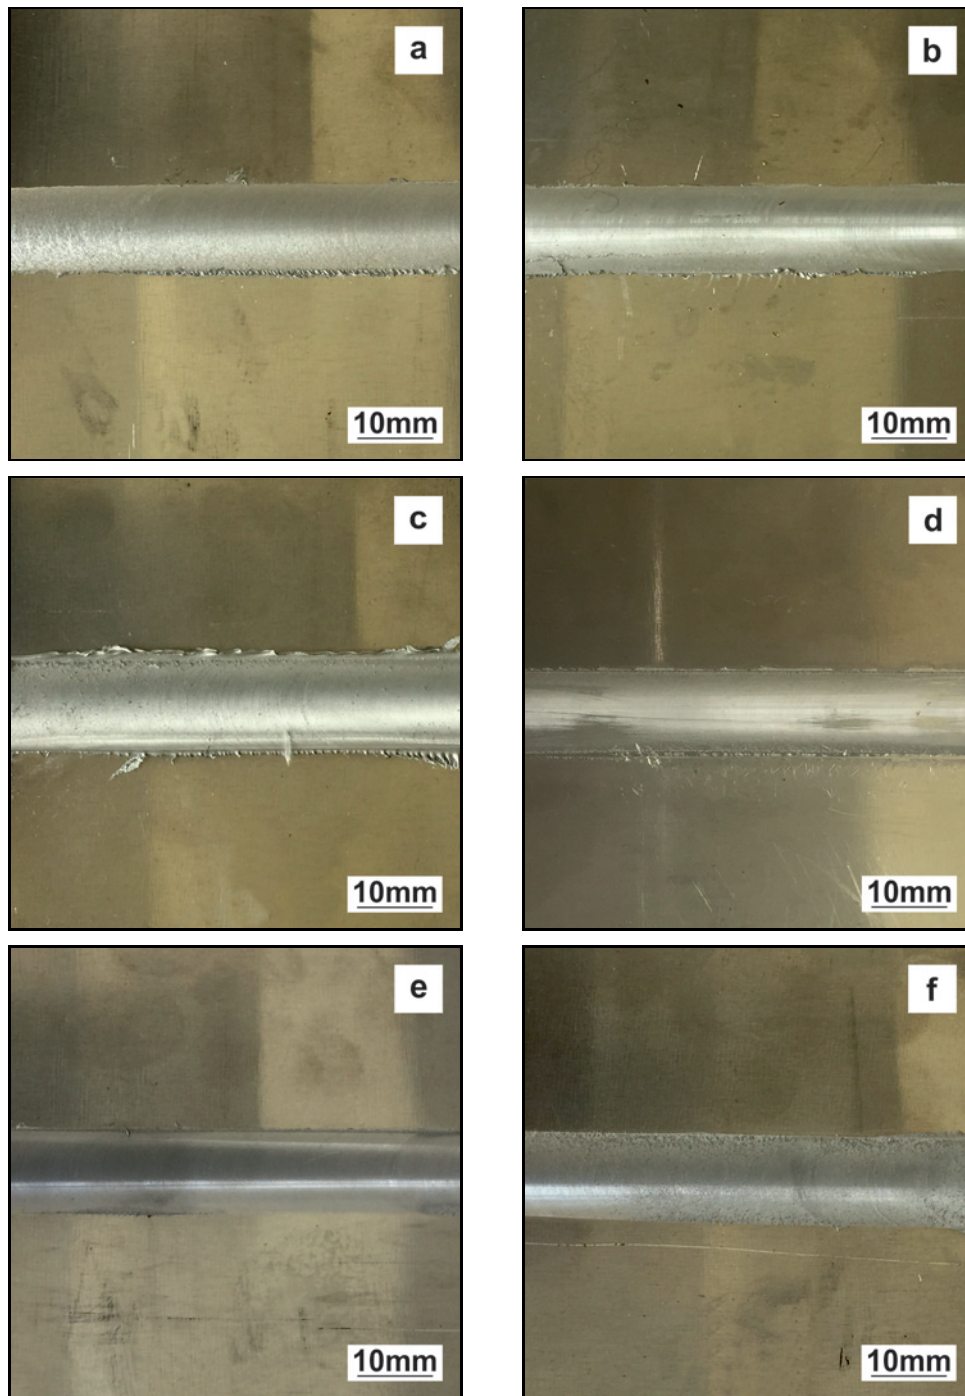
f. Surface images of (a) specimen 1, (b) specimen 2, (c) specimen 3, (d) specimen 4, (e) specimen 5, (f) specimen 6.
